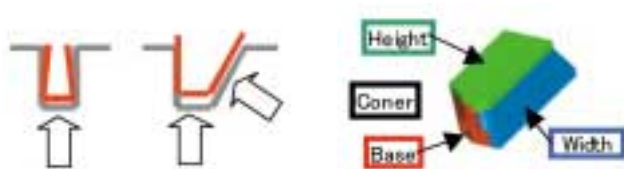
Cutting Force Fig.4 Simulate Tool Rigidity
